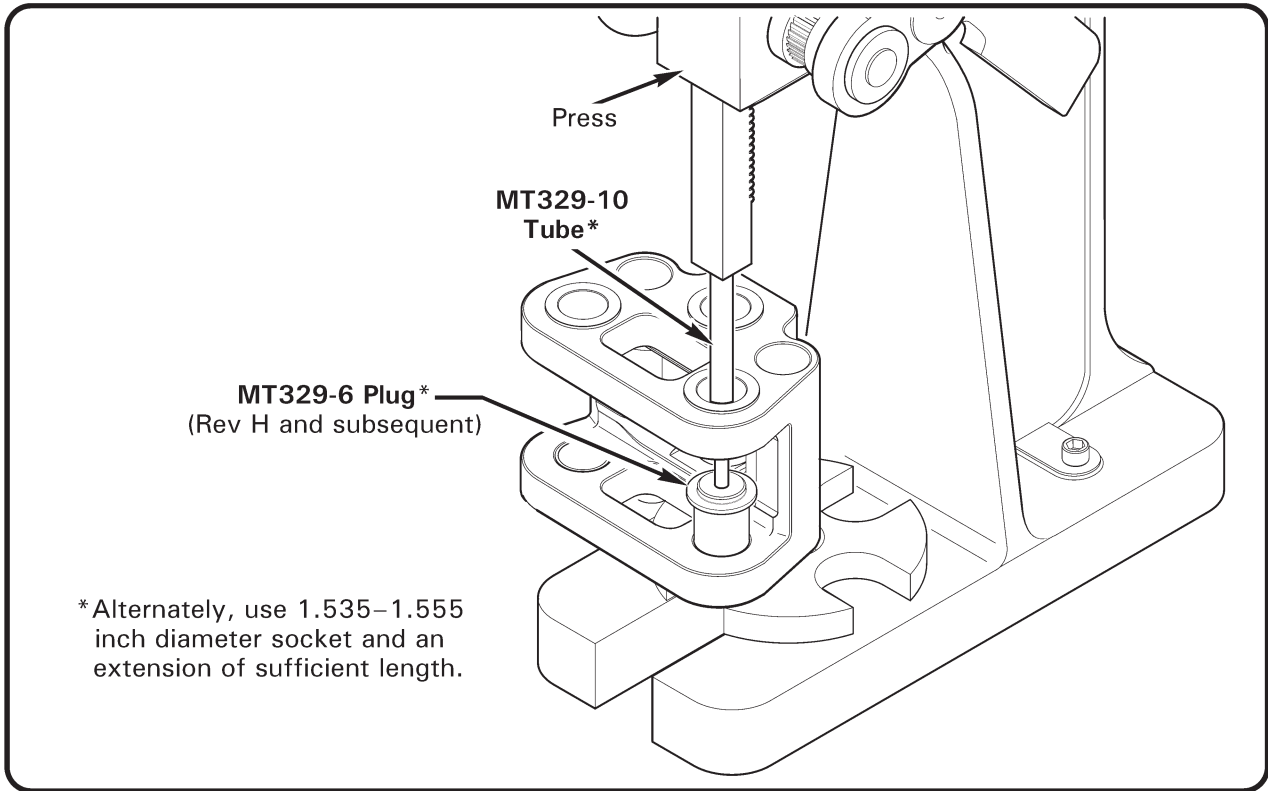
A MAIN ROTOR HUB BEARING REMOVAL
